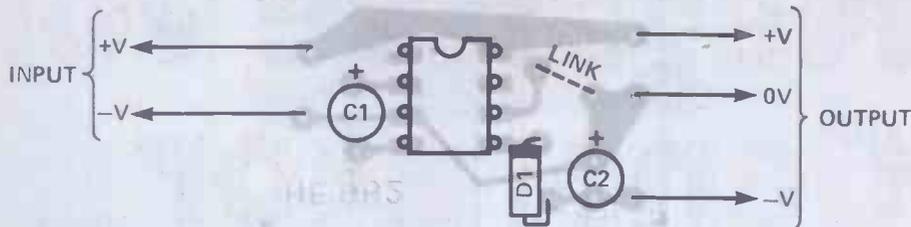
A full-sized PCB is reproduced on the PCB Printout page; note that the low-voltage link is hard-wired, here.
